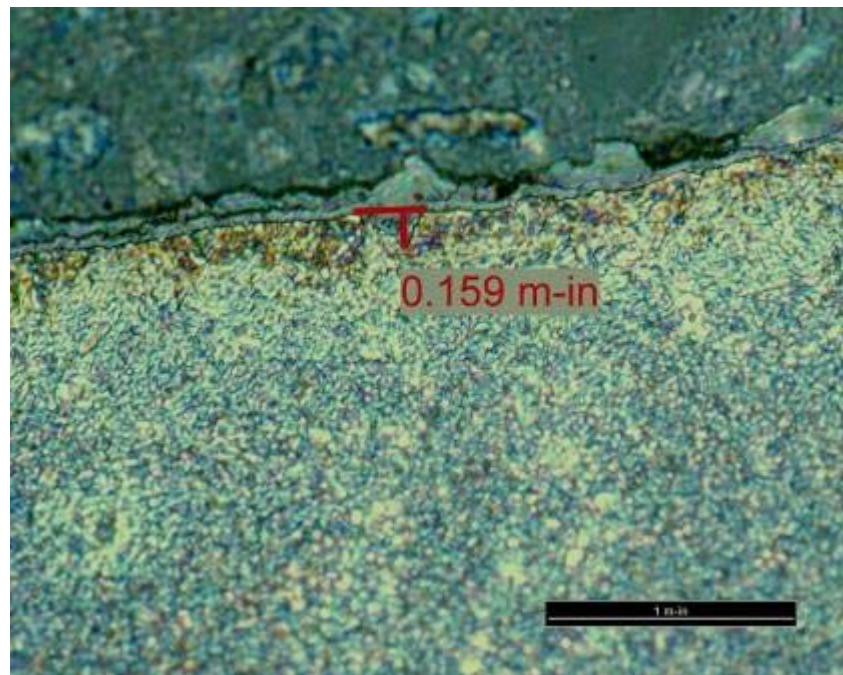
Typical tool mark depth, tooth root, measurement no. 2.
